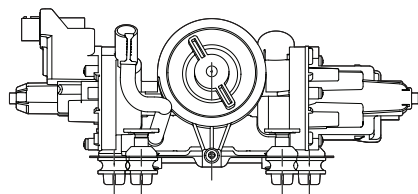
Drain Pump/ Recirculation Pump Assembly
